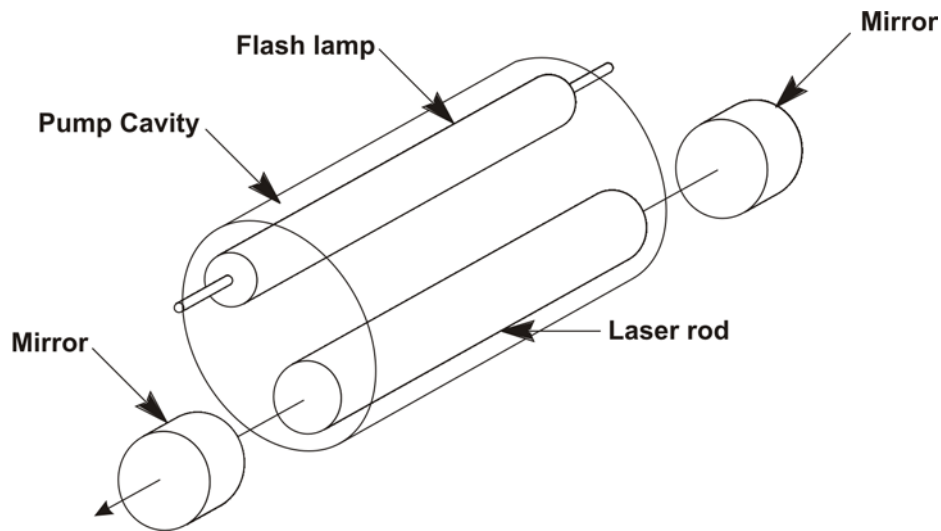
Figure C. Major components of a pulsed Nd:YAG welding laser optically pumped with a flash lamp.
